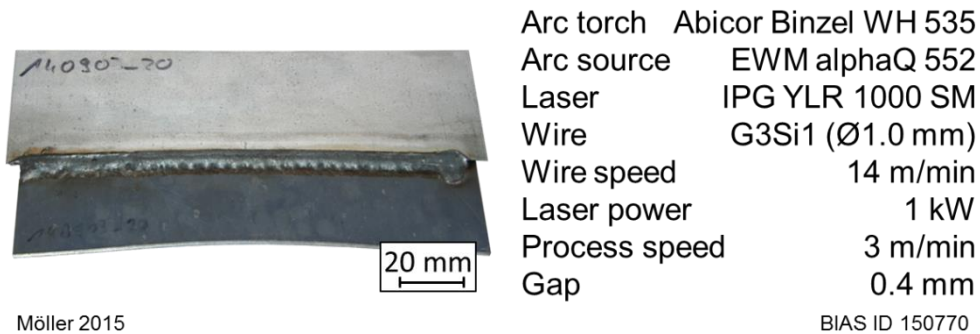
Overlap welded material mix DP800 to 22MnB5
